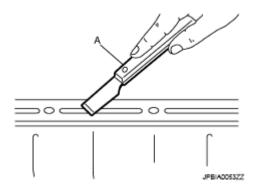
Separating Mating Surface Using Seal Cutter Courtesy of NISSAN MOTOR CO., U.S.A.
